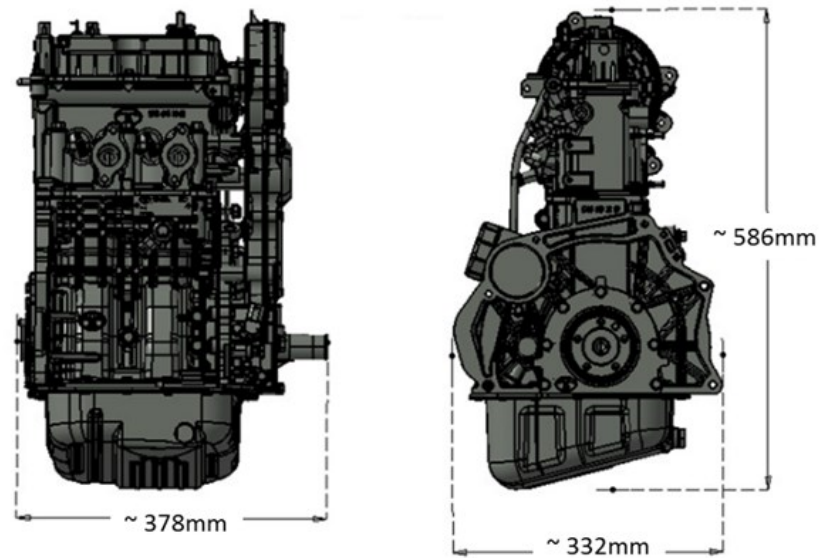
Base engine major dimensions without intake, exhaust and after-treatment [6]
